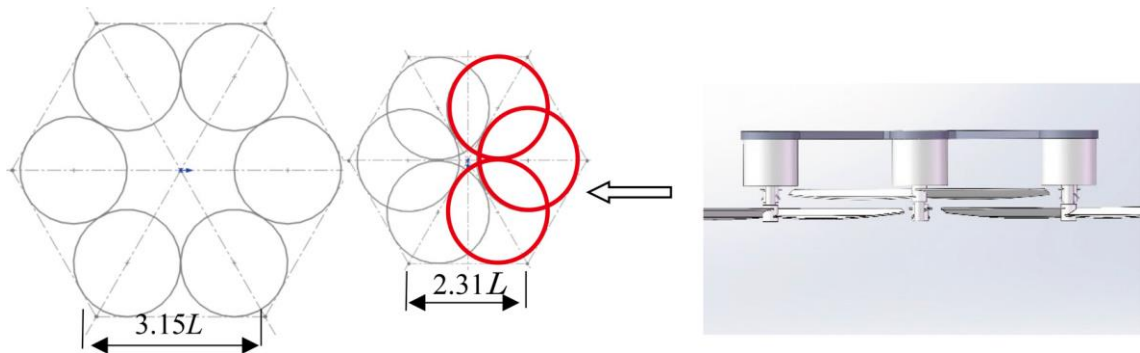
4 Rotor layout of conventional 6-rotor drone (left) Rotor layout of proposed 6-rotor drone (center) Side view of proposed drone structure (right)
